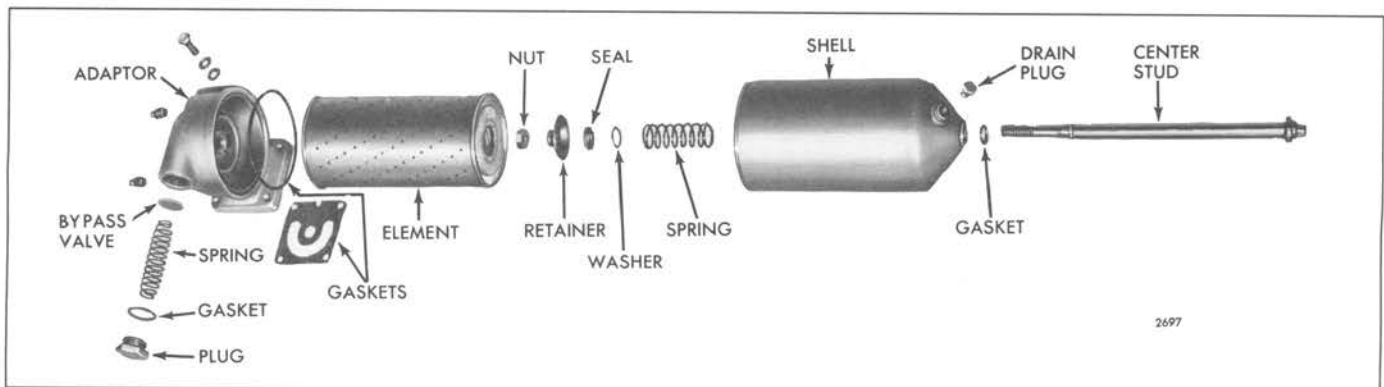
Full Flow Oil Filter Details and Relative Location of Parts
